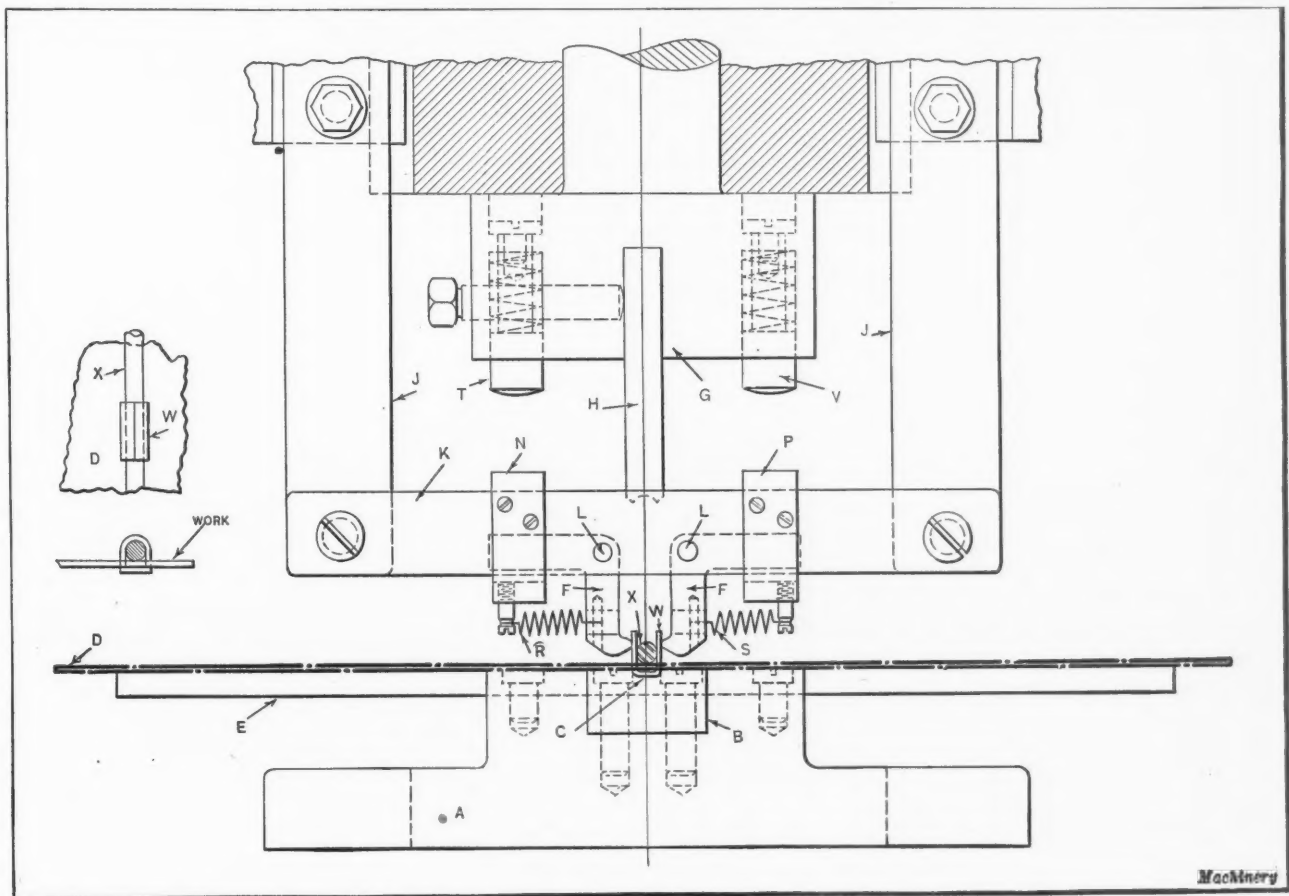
Die employed to clinch Clips over Wires assembled on Cardboard
